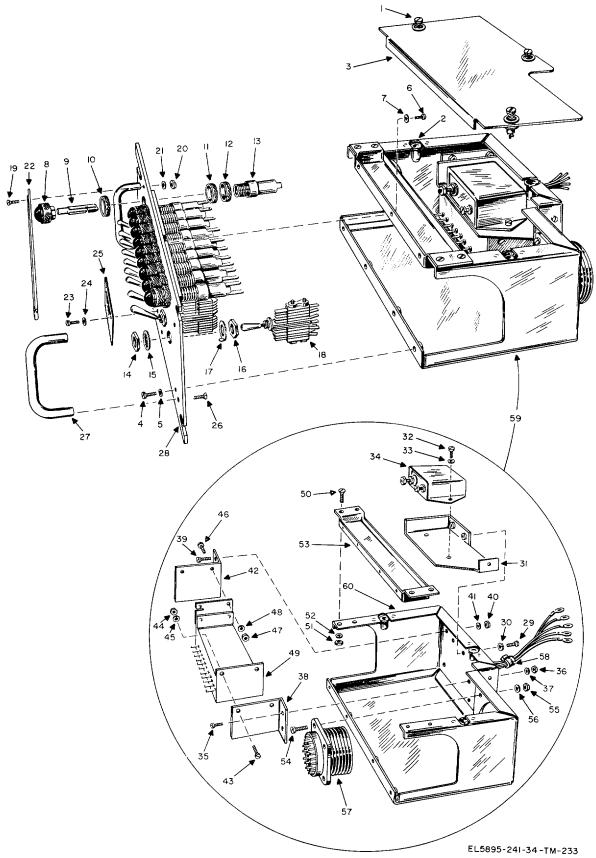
Terminal, Telephone TA-406/FSW-8, exploded view.
